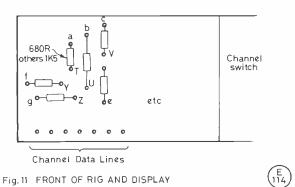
View from the component side of the display PCB (the resistors shown should be removed). The labelling shows T, U, V, Y, Z, though only four of these would be used, depending on the circuit; the segment connections go to pins 9 to 15 of the 74LS47. The hole just below 'V' is left vacant.
